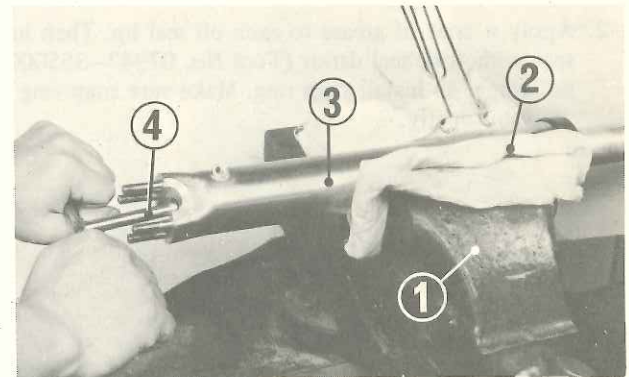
(1) Vise (2) Waste (3) Front fork (4) 6 mm Allen wrench
